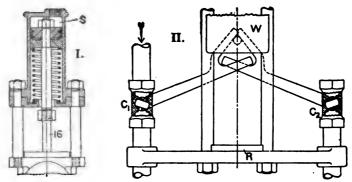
Detail of Speed-limit Governor, Snow Gear.
